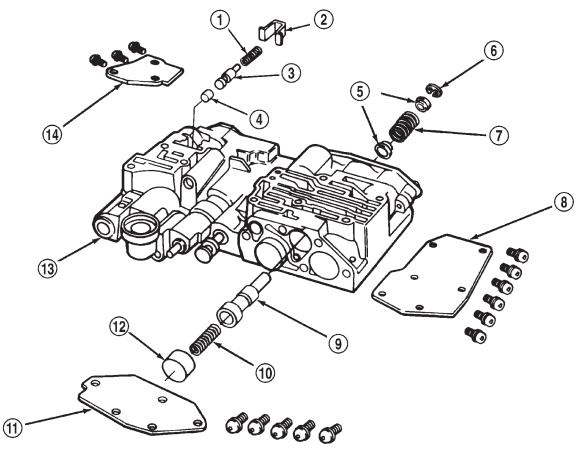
Shuttle Valve E-Clip And Secondary Spring Location
